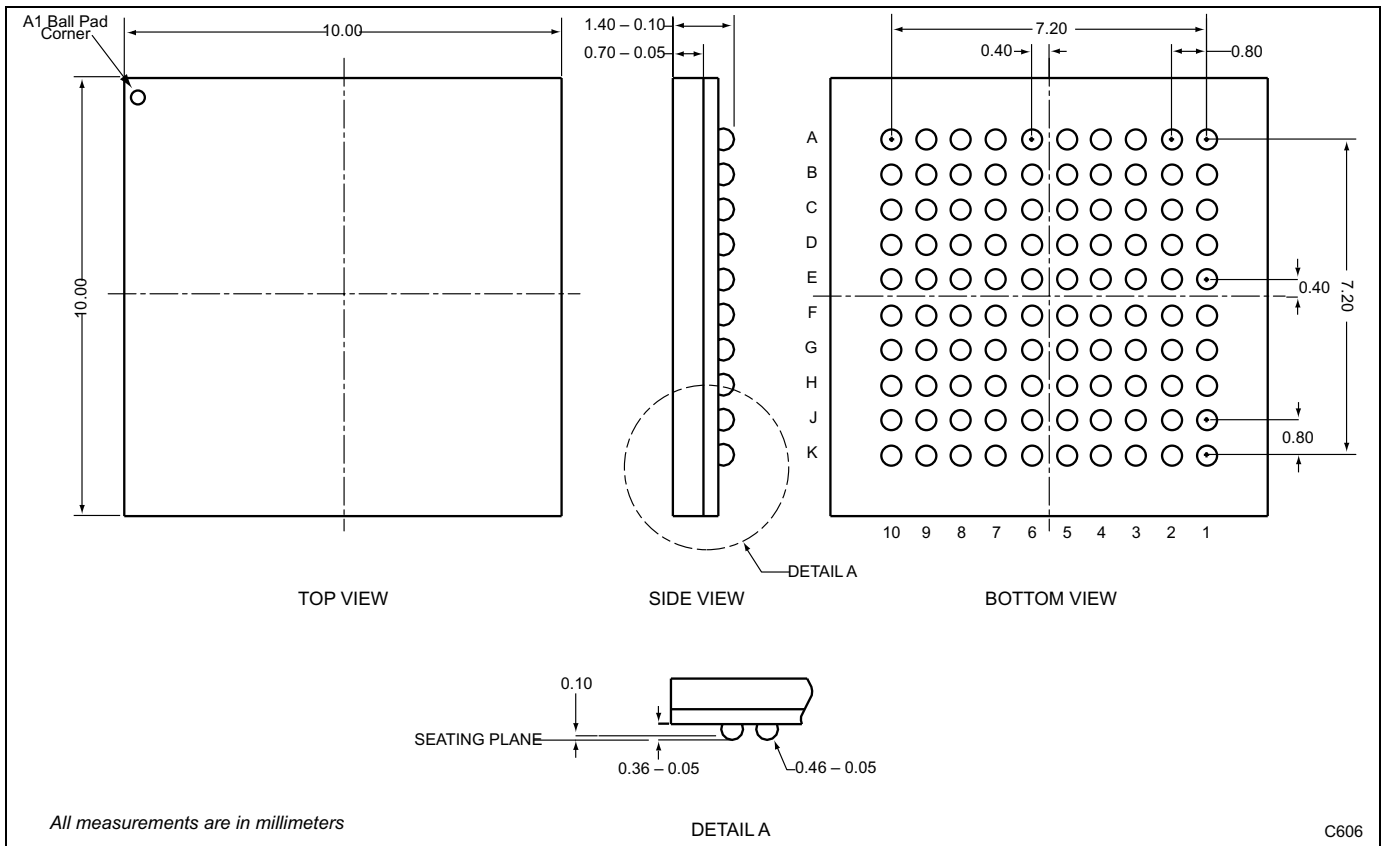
IA Device 100-Pin CABGA Package Dimension Drawing
